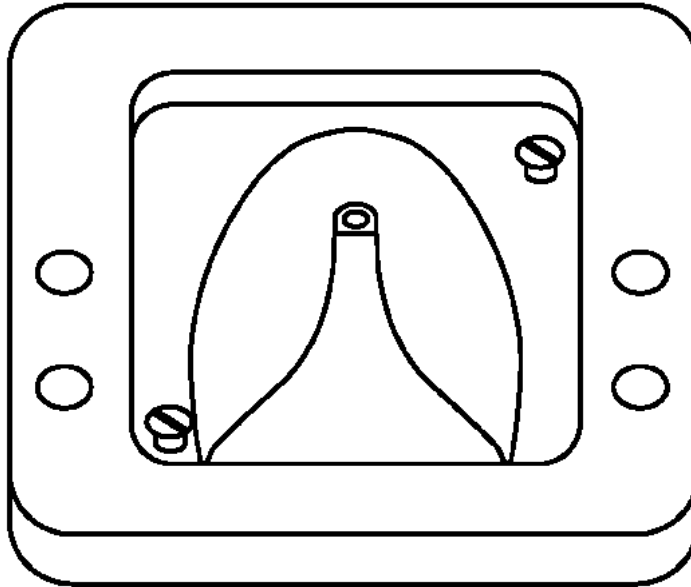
Metal mounting tray with heel in position before addition of molten alloy
